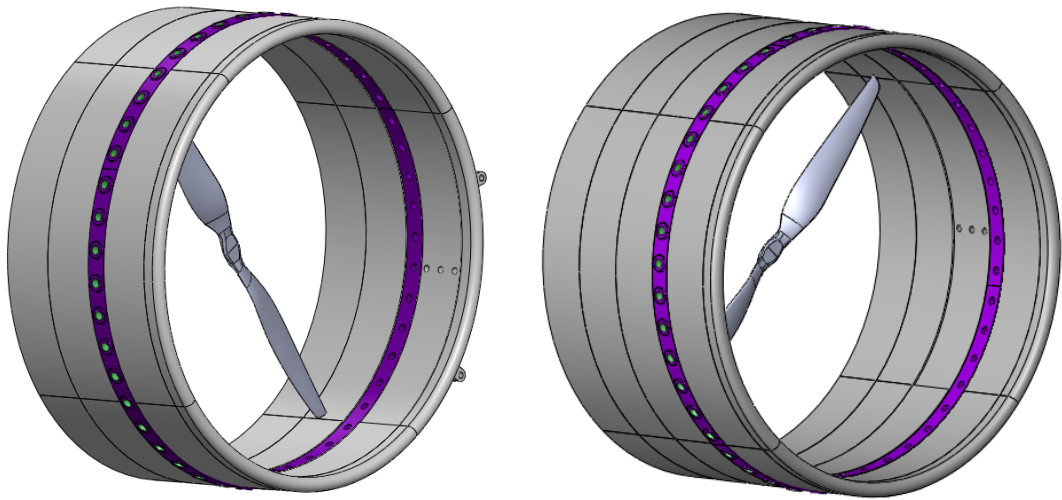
CAD view of the short setup Figure 2.10: CAD view of the long setup
